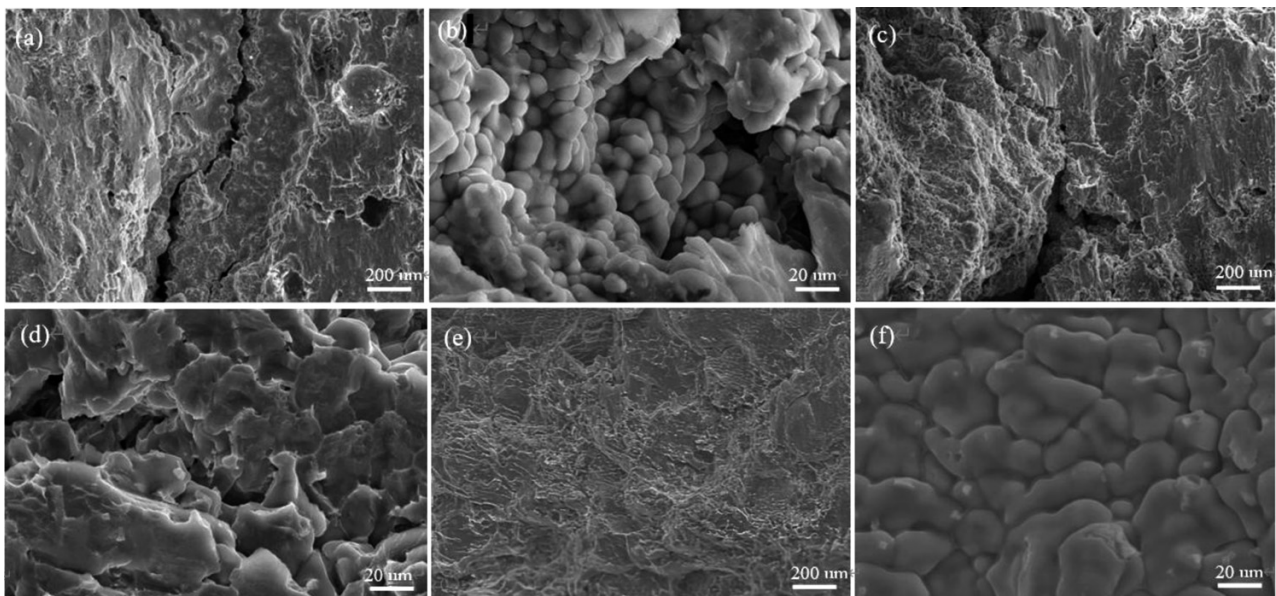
Fracture morphology diagram: (a) The fracture morphology of the joint surface under a current of 12 kA, (b) The fracture morphology at high magnification, (c) The fracture morphology of the joint under 14 kA current is similar to that under high magnification (d), (e) The fracture morphology (f) of the joint surface under 16 kA current is the fracture morphology at high magnification
